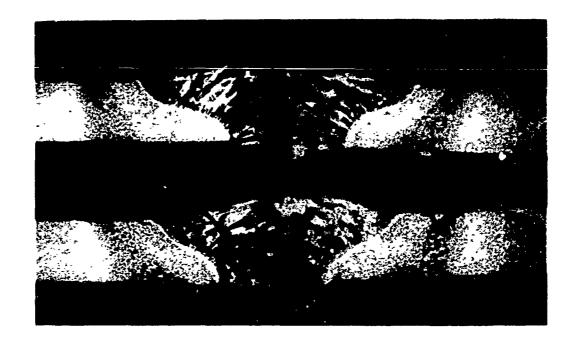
DCRP-GMA welds in .090-in. 2014-T6 sheet showing change in bead shape with 100% Ar shielding and decreasing weld travel speed
